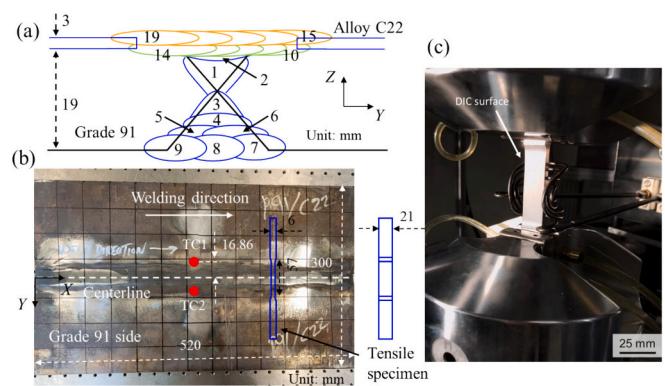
(a) G91/C22 weld bead setup, (b) G91/C22 weldment after post-weld heat treatment, and (c) the setup for room temperature tensile testing with DIC to measure the strain map. Positions of thermocouples were denoted by red points, and the tensile test sample extraction is highlighted by blue lines in (b). Note that the induction coil for high-temperature testing was not used in this study. (For interpretation of the references to colour in this figure legend, the reader is referred to the web version of this article.)
